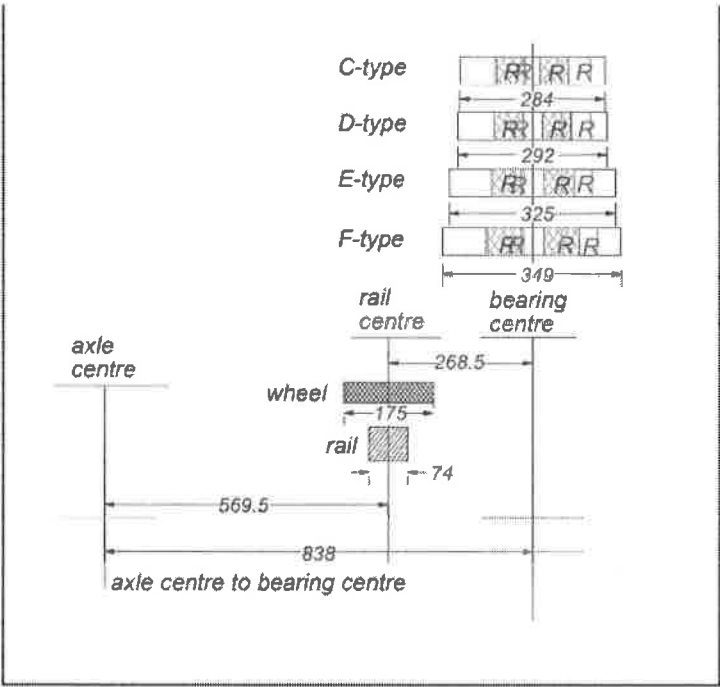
Measurement position for bearing types used by Transnet relative to rail geometry
